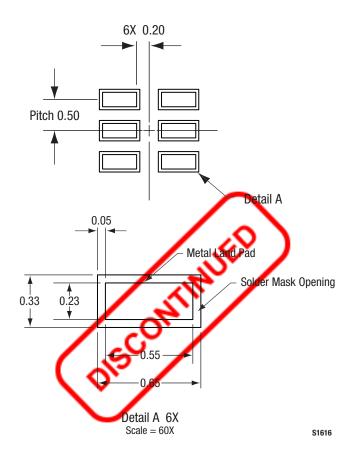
AS211-334 PCB Layout Footprint (Top View)
